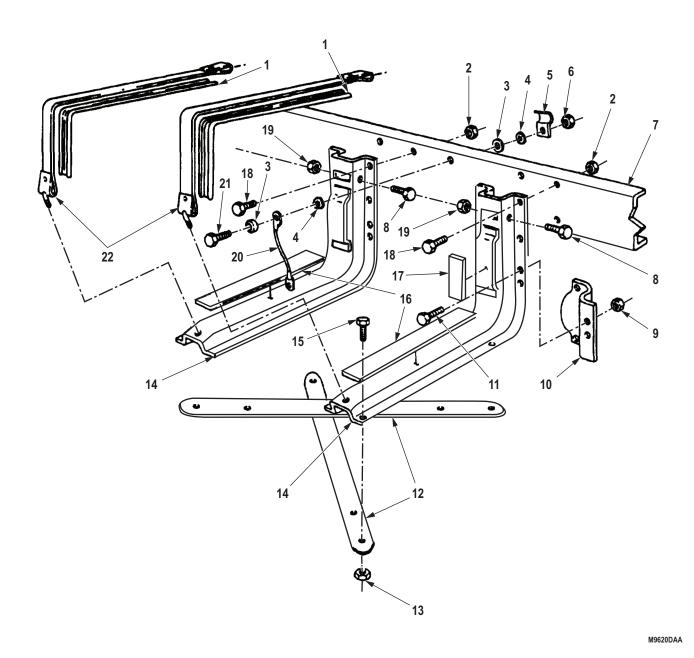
Fuel Tank Hangers and Retaining Straps Inspection.
